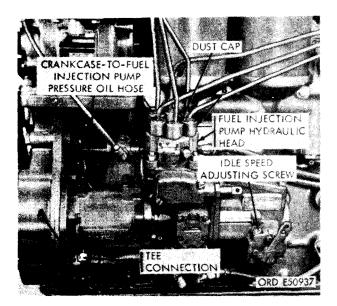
DISCONNECTING OR CON-NECTING CRANKCASE - TO - FUEL INJECTION PUMP PRESSURE OIL HOSE AT PUMP AND LIFTING DUST CAPS.
